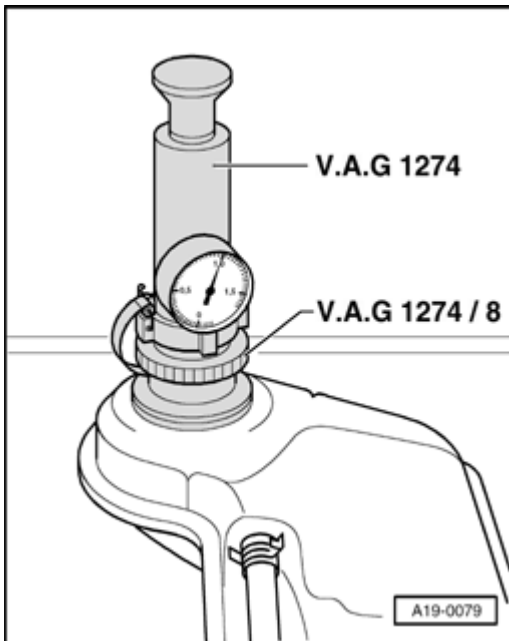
Attaching Cooling System Tester V.A.G 1274 With Adapter V.A.G 1274/8 To Expansion Tank
